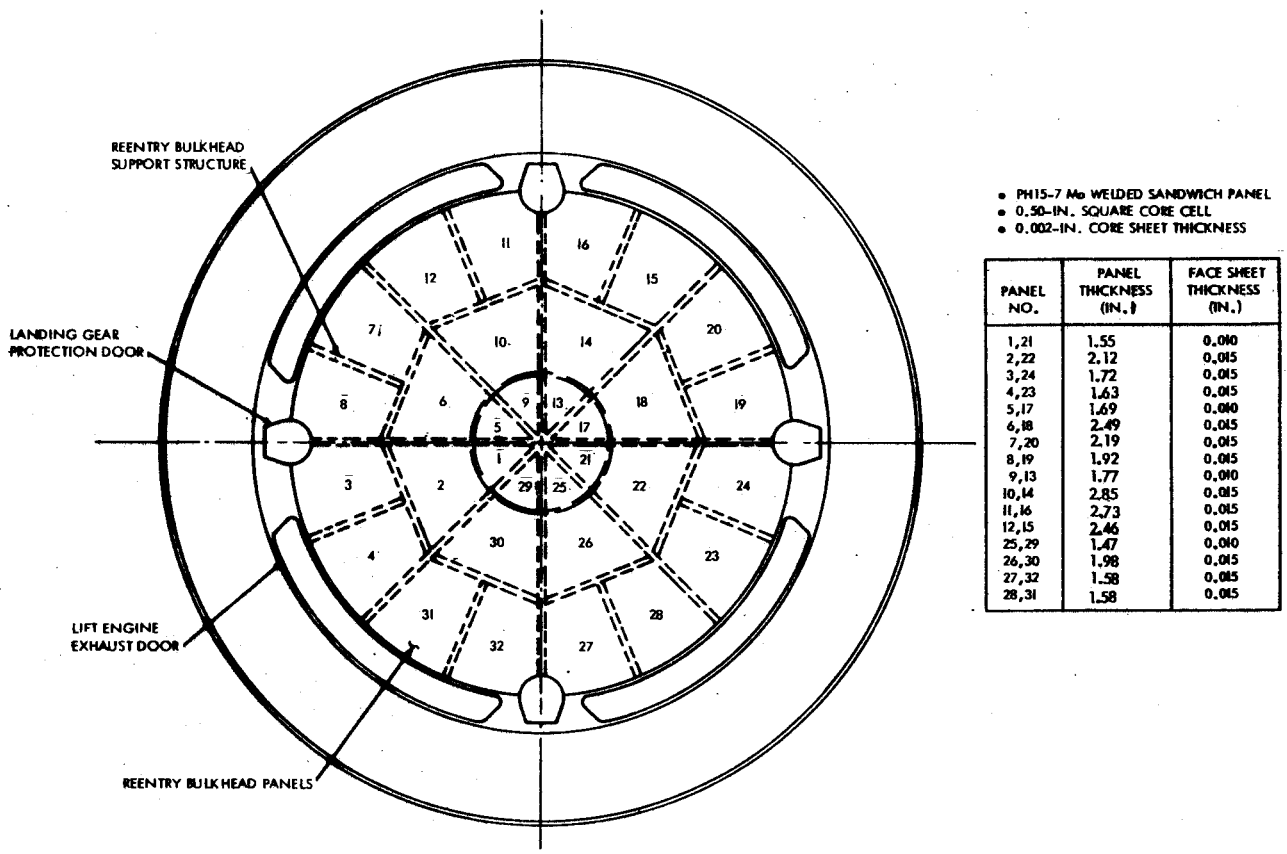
Reentry Heat Shield Structural Arrangement
